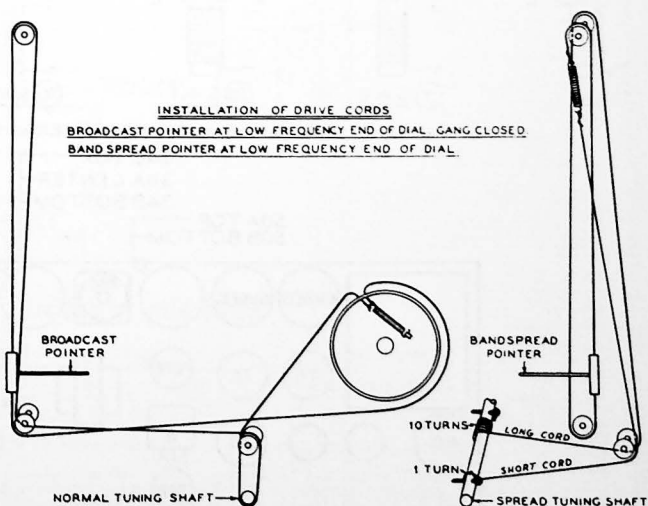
INSTALLING TUNING DRIVE CORDS
